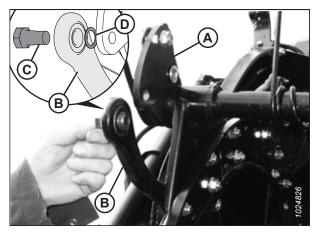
Bar Crank Attachment Holes and Link Alignment
